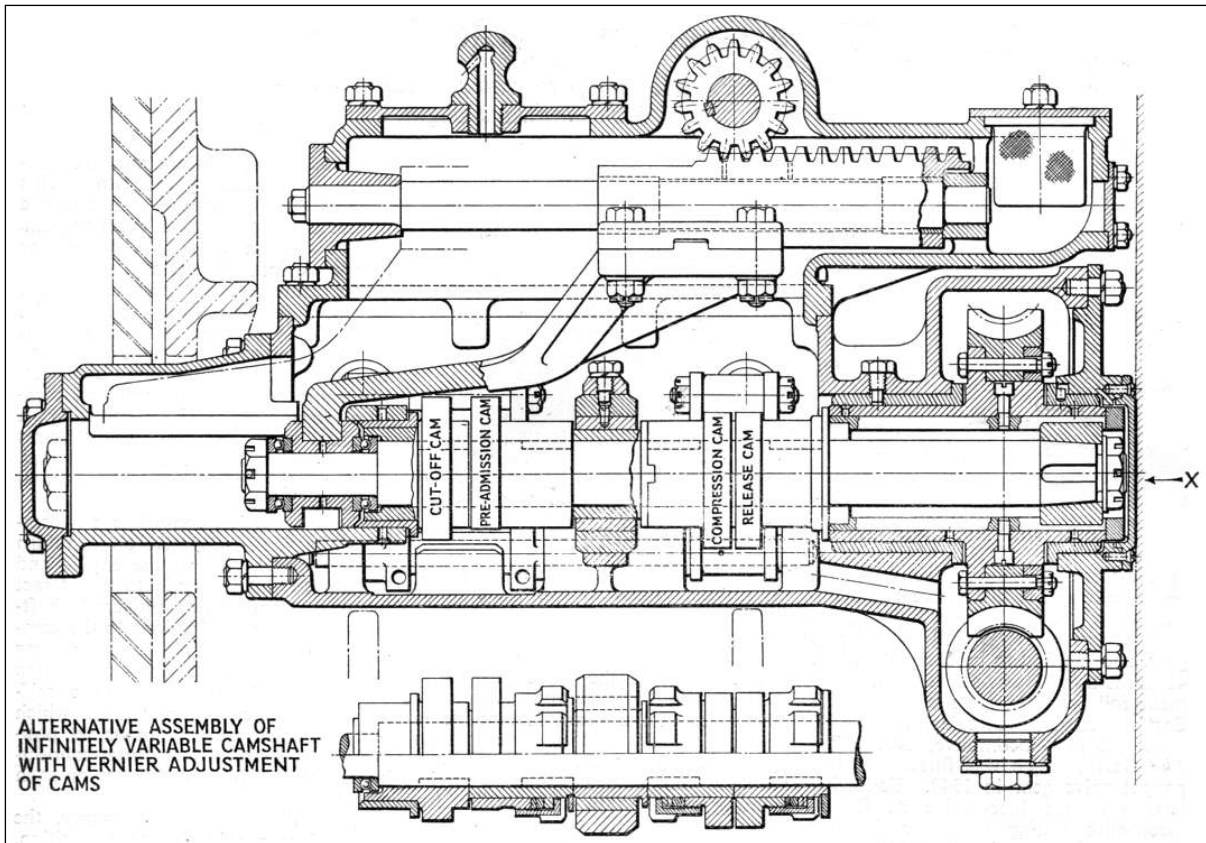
Reidinger Cam shaft cross section – replacement for RC gear
